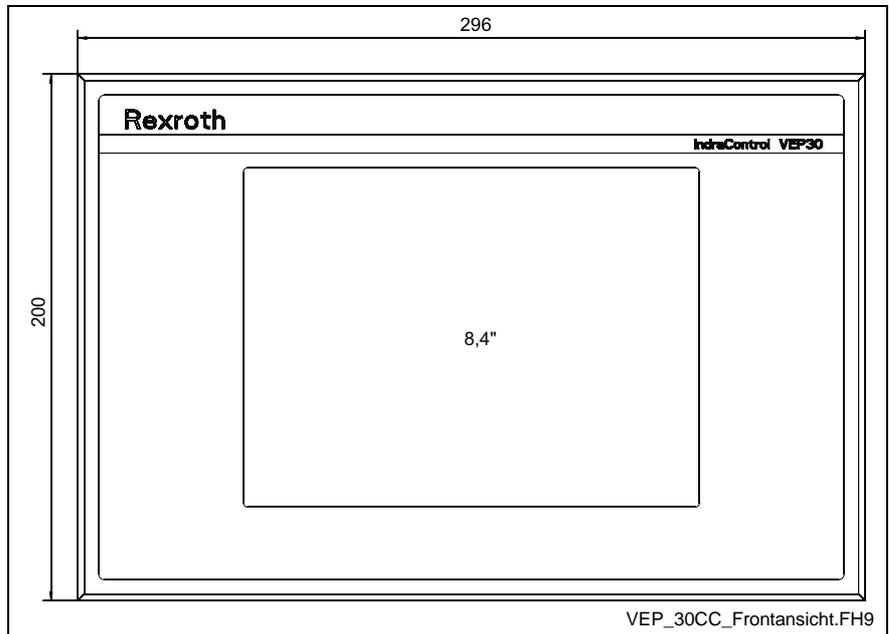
Dimensions - Front panel VEP30.1CCU
